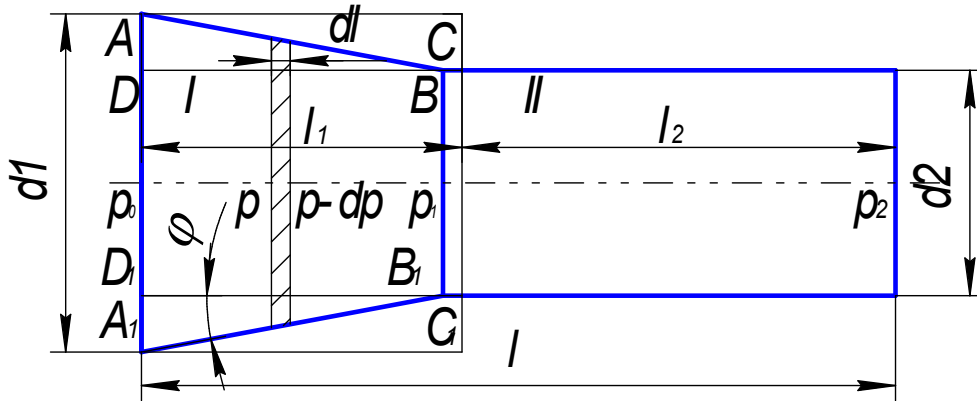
Geometry of standard hole for pellet press with flat die. Design scheme
